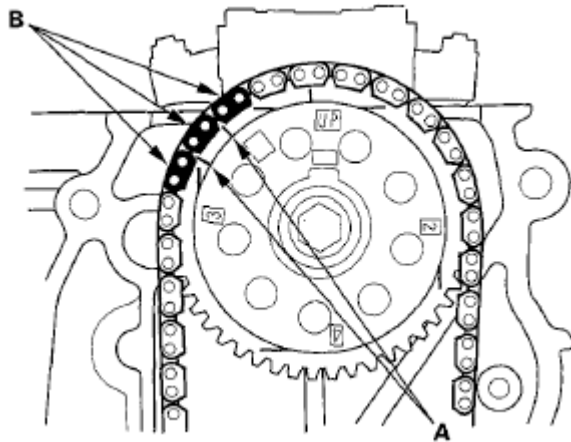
Identifying Cam Chain On Camshaft Sprocket With Pointers
